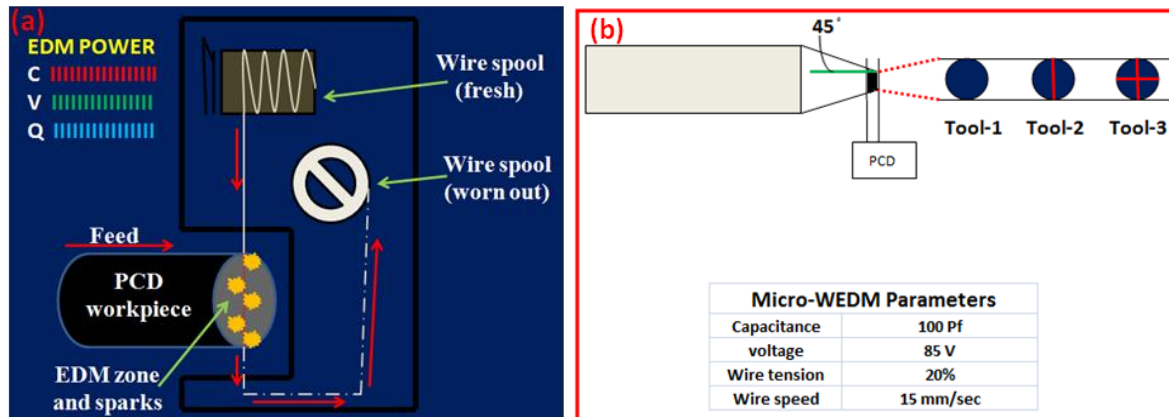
(a) micro-WEDM setup for tool modification; (b) Types of tool and micro-WEDM parameters
